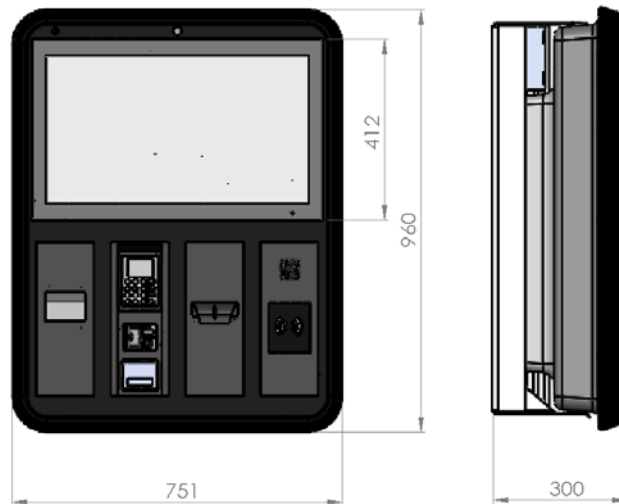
PAY FRAME 600, with illuminated frame, dimensions in mm
